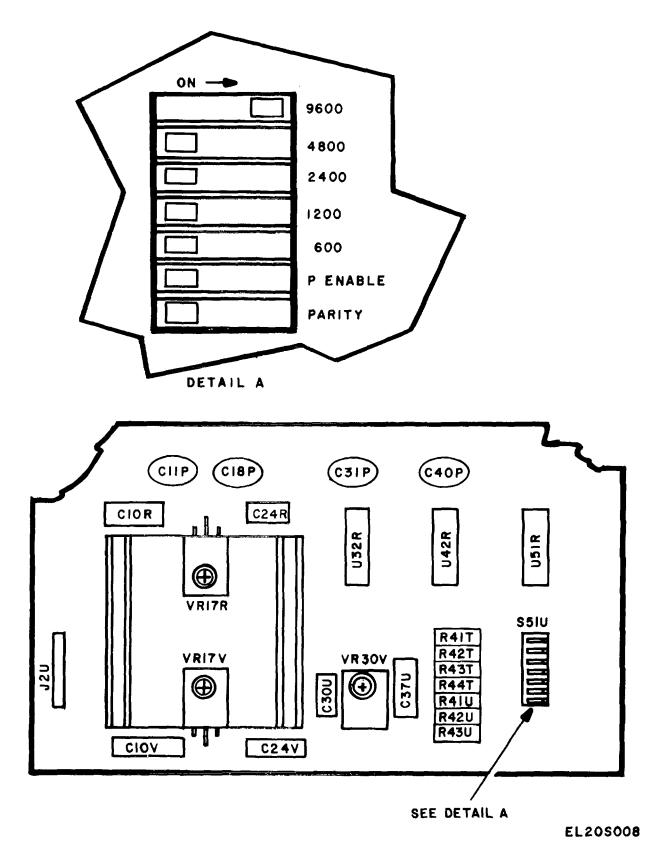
Partial View of Circuit Card Assembly, RS-232 I/0
